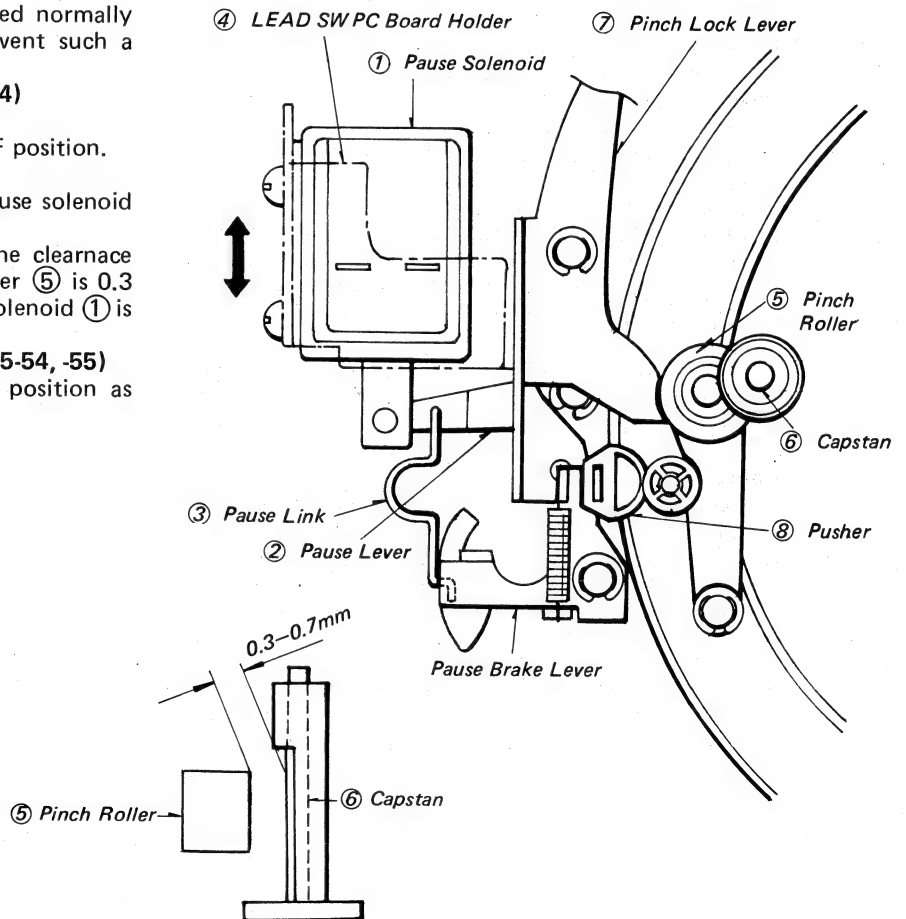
Pause Solenoid Positioning and Replacement.
